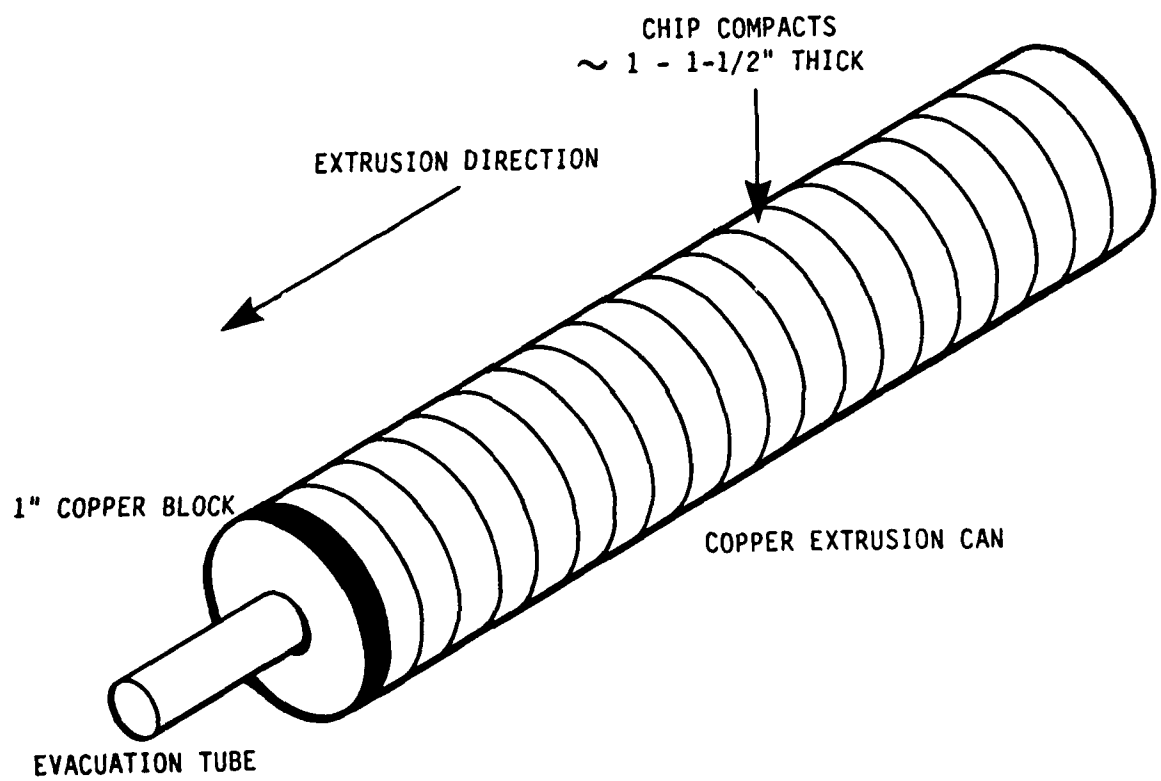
EXTRUSION CHIP BRIQUETTE ASSEMBLY
